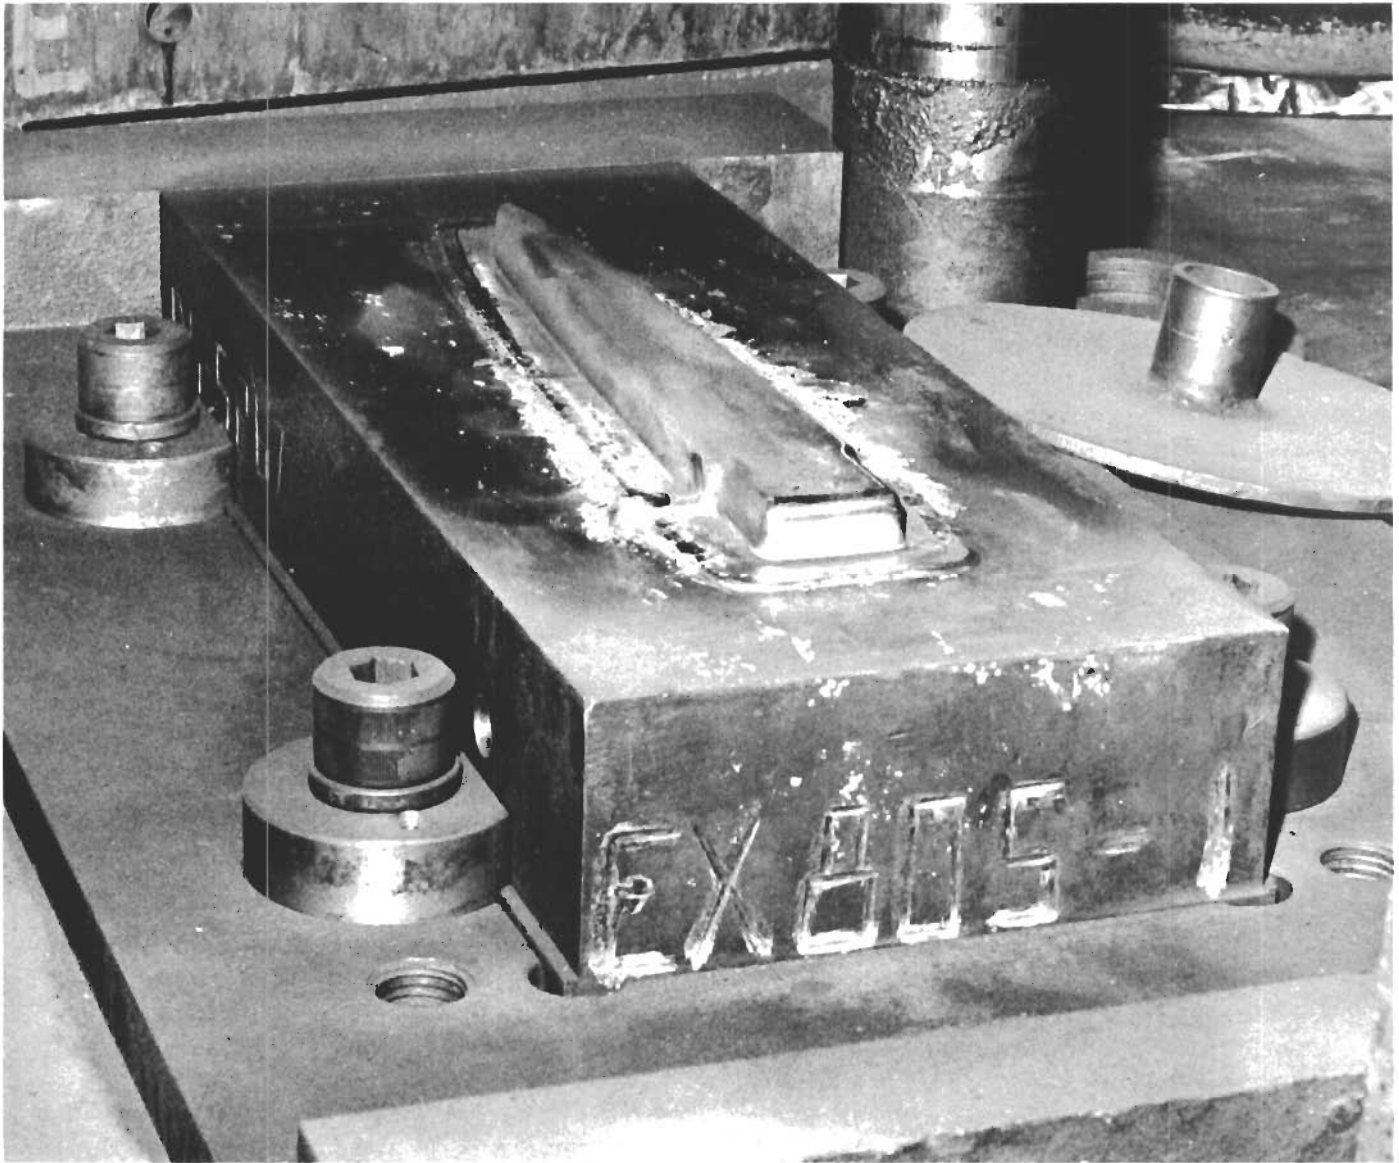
Lower Die for the Finish Forging Operation with the 4000. Ton Mechanical Press. Shown in Lower Half of Four-Post Bolster after Completion of Program Forging Efforts and Removal of Bolster from the Press.
